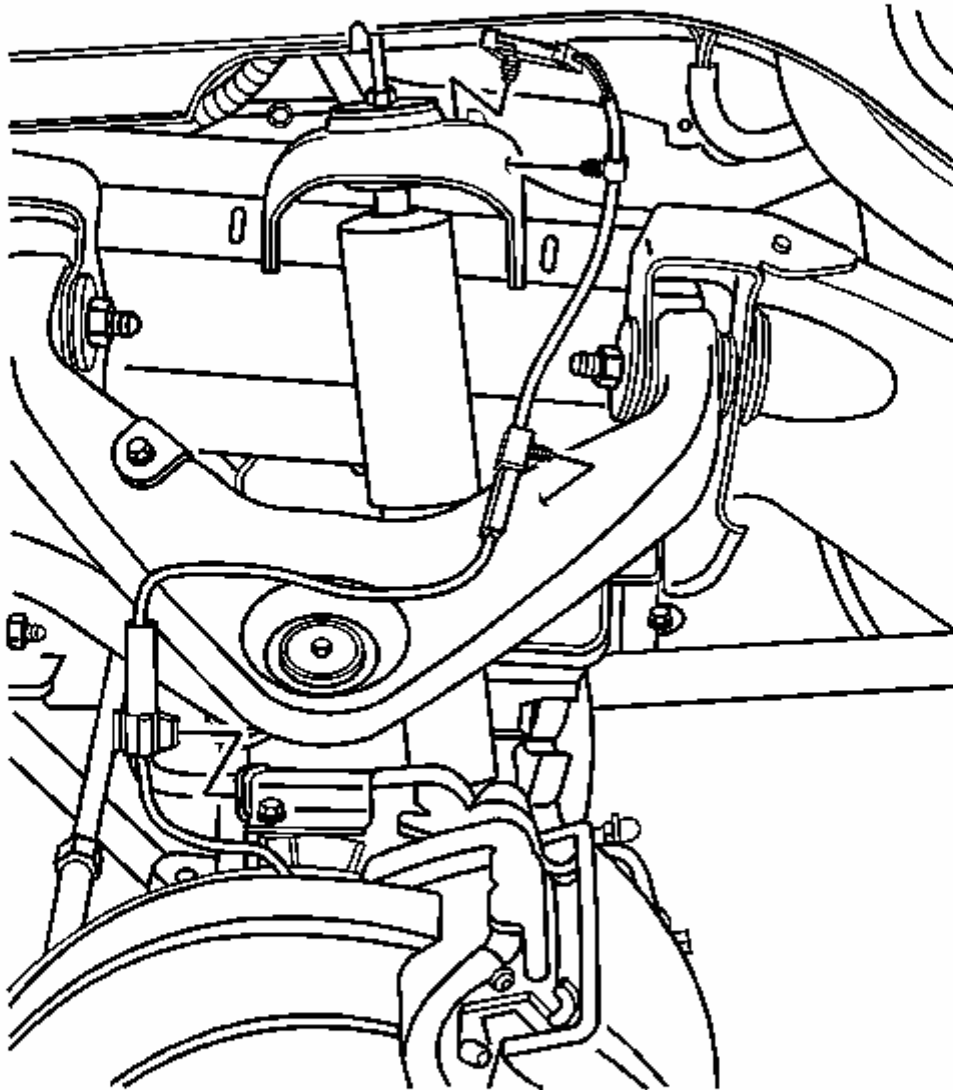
View Of Wheel Speed Sensor Cable And Connectors
